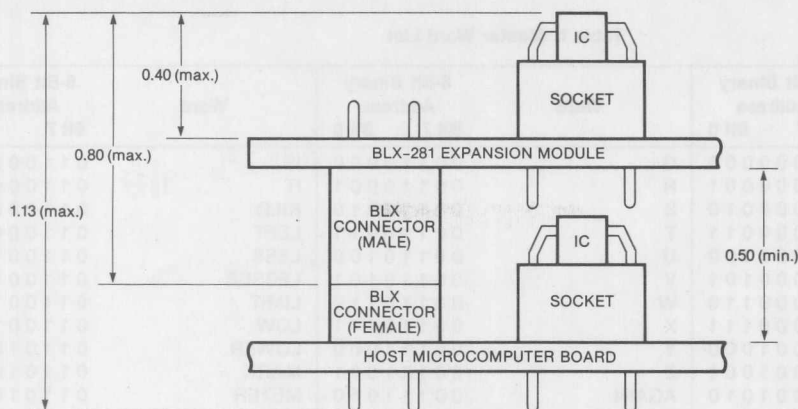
BLX-281 Expansion Module Mounting Clearances (inches)
